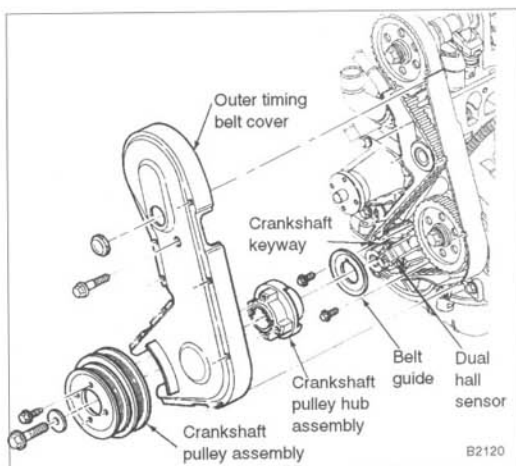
Dual Hall sensor is located on the crankshaft under the outer timing belt cover—2.3L DP. Two rotary vane cups are mounted on the damper, one for each of the two Hall-effect sensors.
